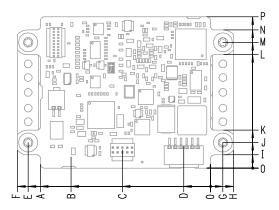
BR\_XETK-S2.0 Dimensions - Top View (1)
